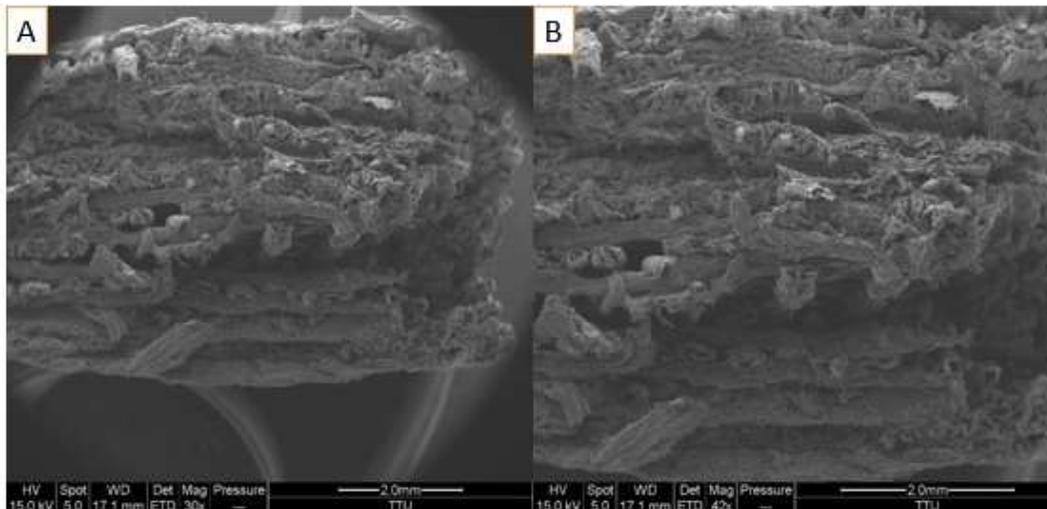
FGM samples after fatigue testing (A) cross-section (B) side view
